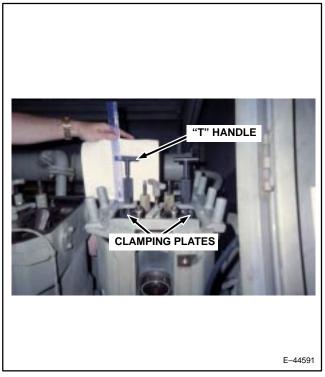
Align TESCO Air Motor Support Bracket Clamping Plates And "T" Handles.
